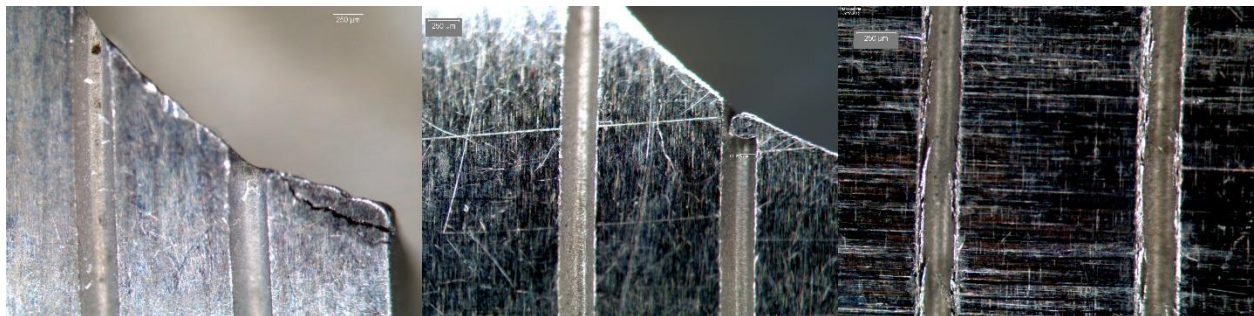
Damaged surfaces of hydraulic spool valves from the pitch control system of a wind turbine exhibiting a) fatigue cracking, b) displaced metal in metering groove, c) surface abrasion and wear debris in metering groove
